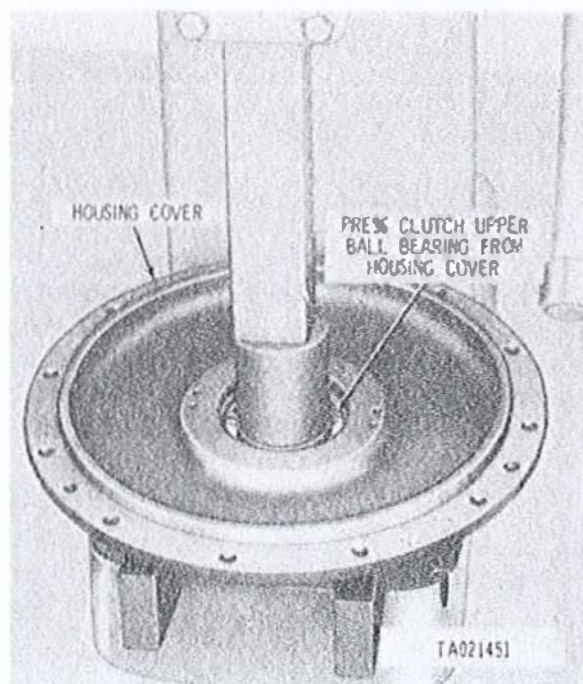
Removing fan drive clutch upper ball bearing from housing cover.
